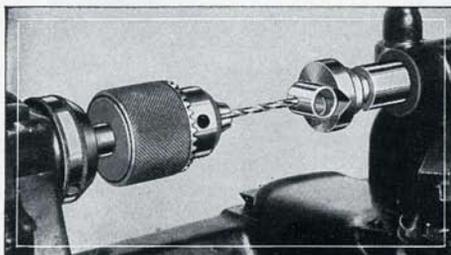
Drilling Round Work Held in Crotch Center in Tailstock
